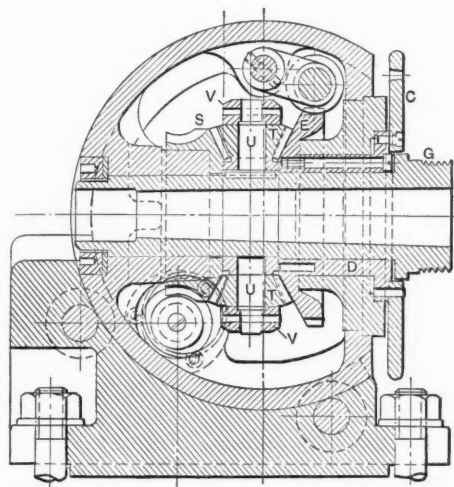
Dividing Head for Universal Milling Machine which indexes Work Automatically
